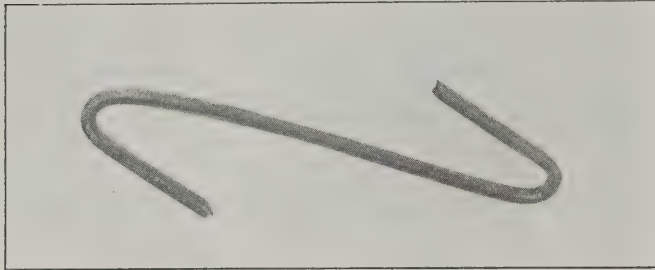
A Sister Hook Made From Old Steel Contact Wire
